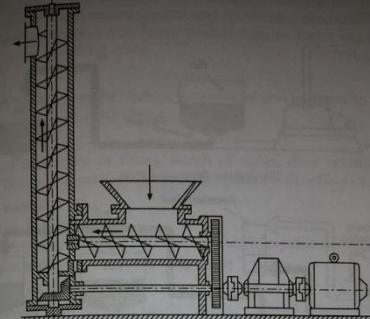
Vertical screw conveyor with a screw feeder.
